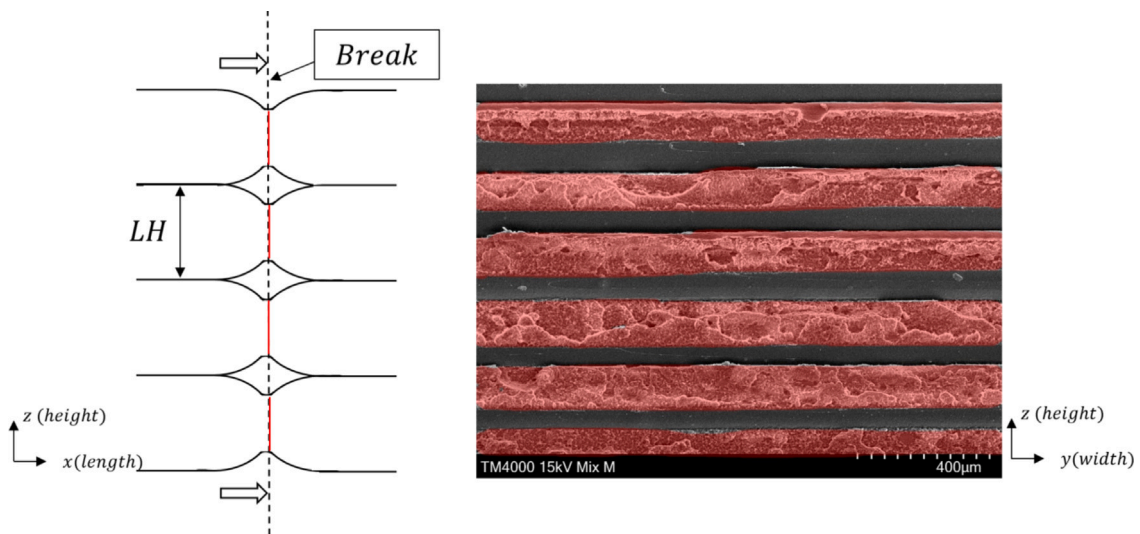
Fractography for the samples printed at 90° with a layer height of 0.2 mm and 1 mm nozzle diameter.
